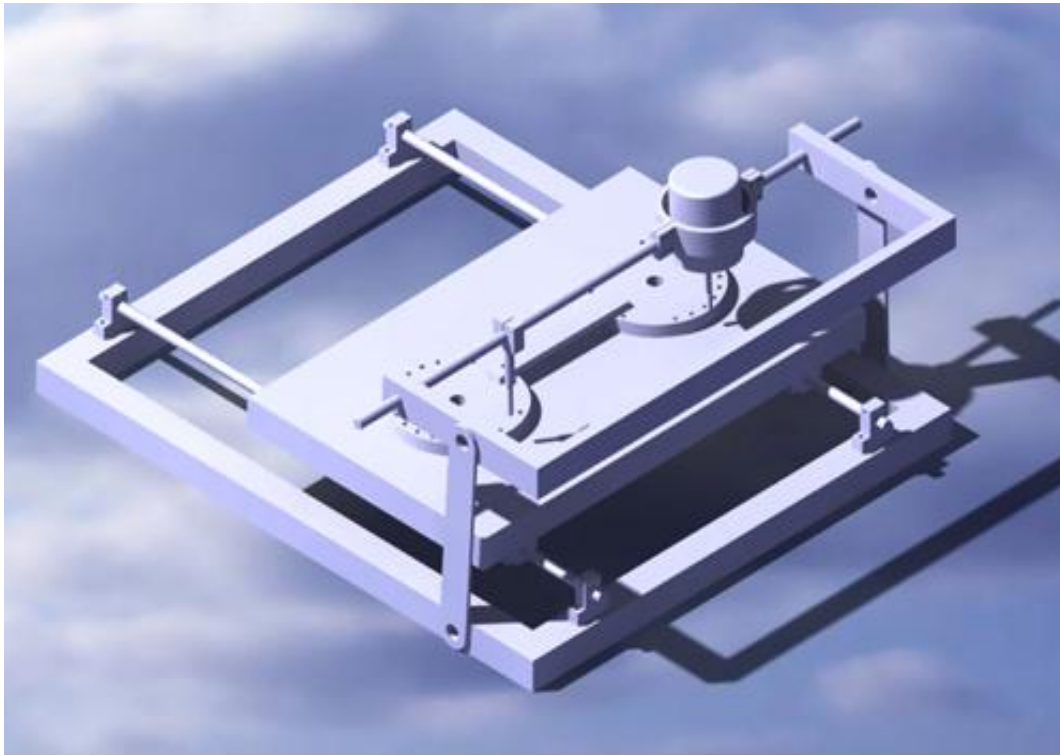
Model of Three dimensional wood duplicator machines.
